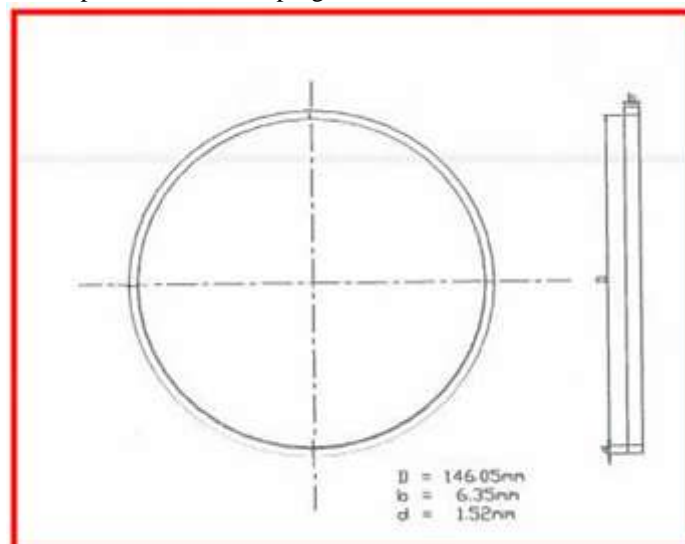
The dimensions of NOL ring specimen (ASTM D 2290)
